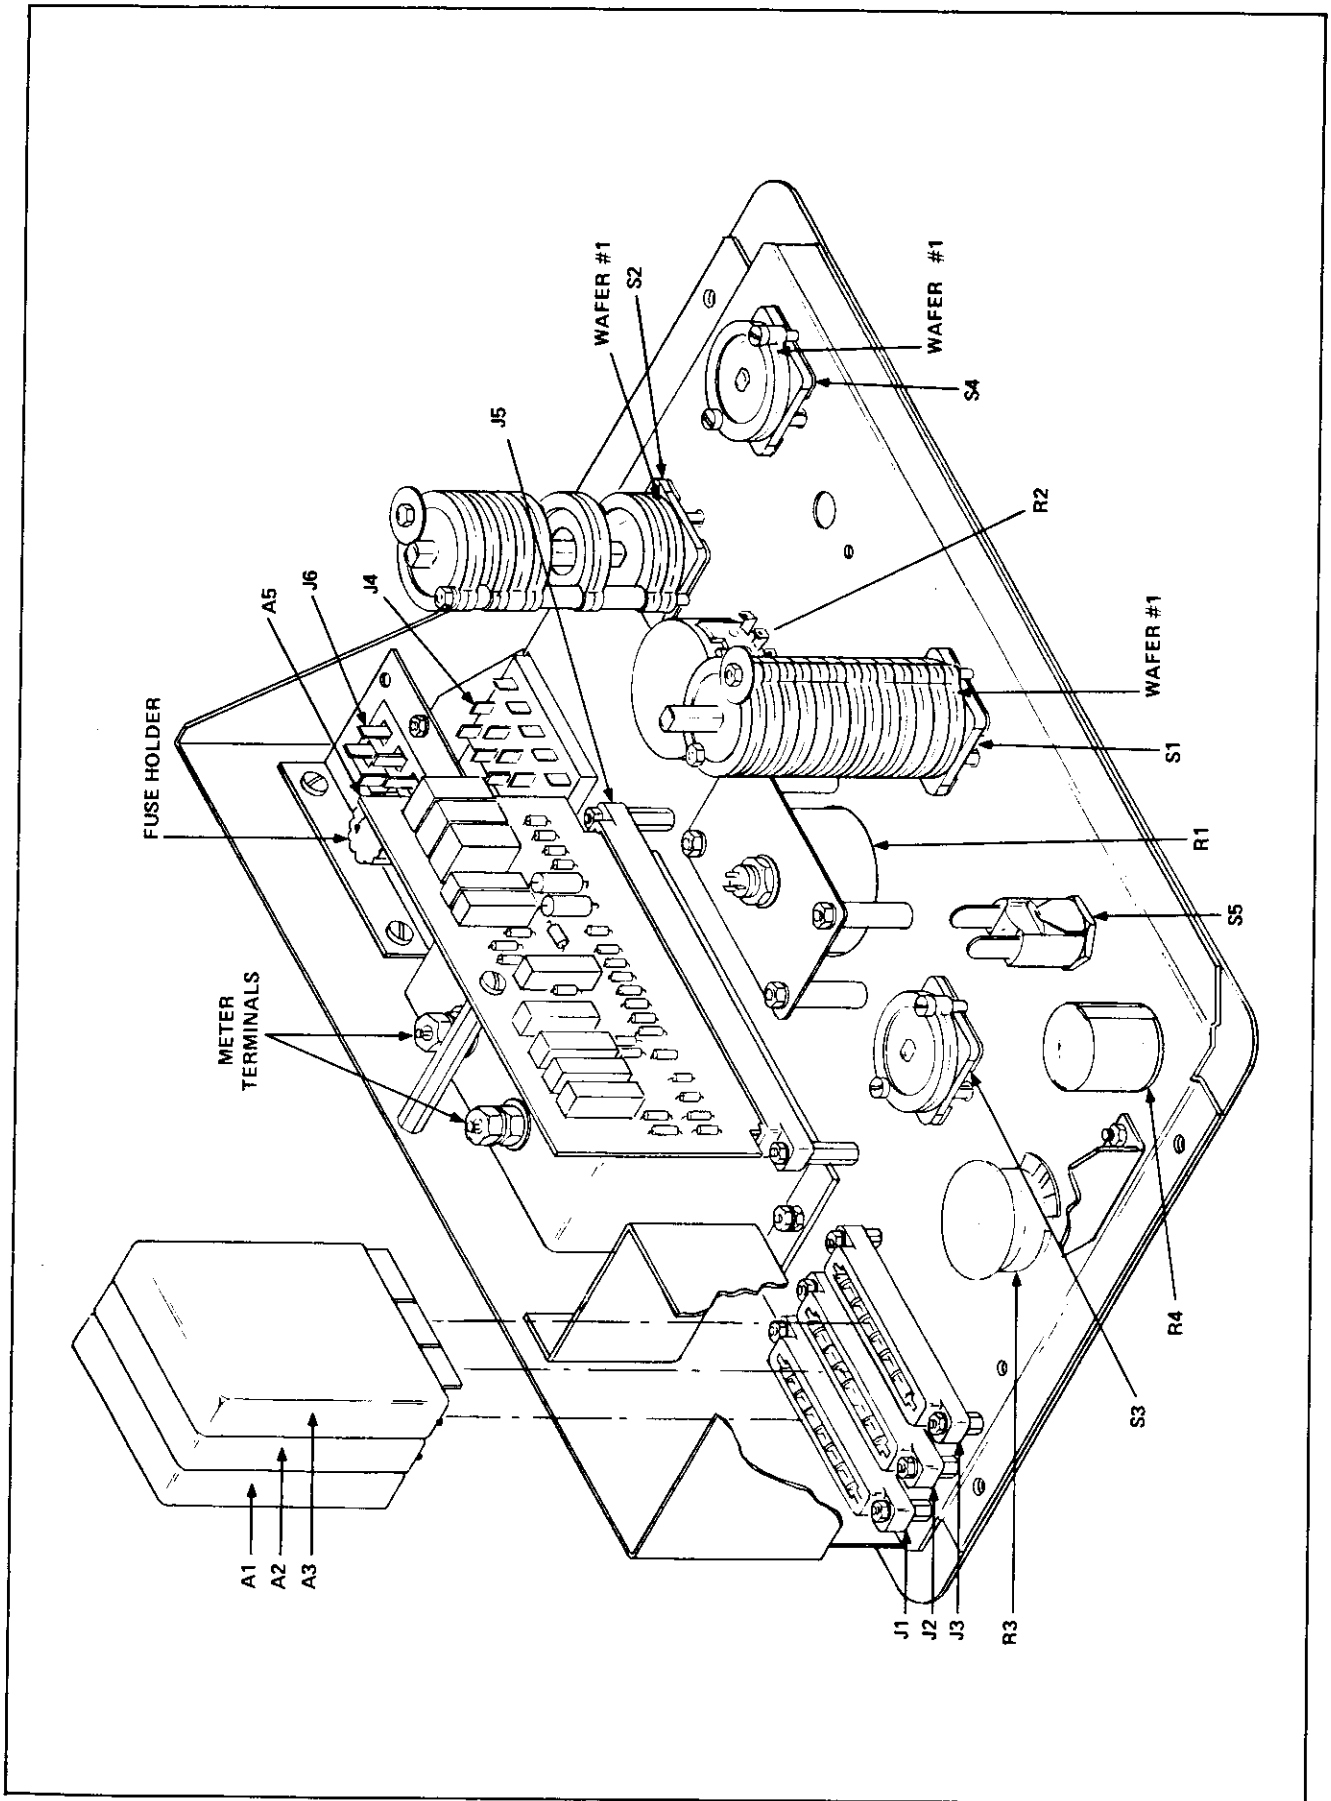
Exploded View of Dynatel Model 710A Interior
